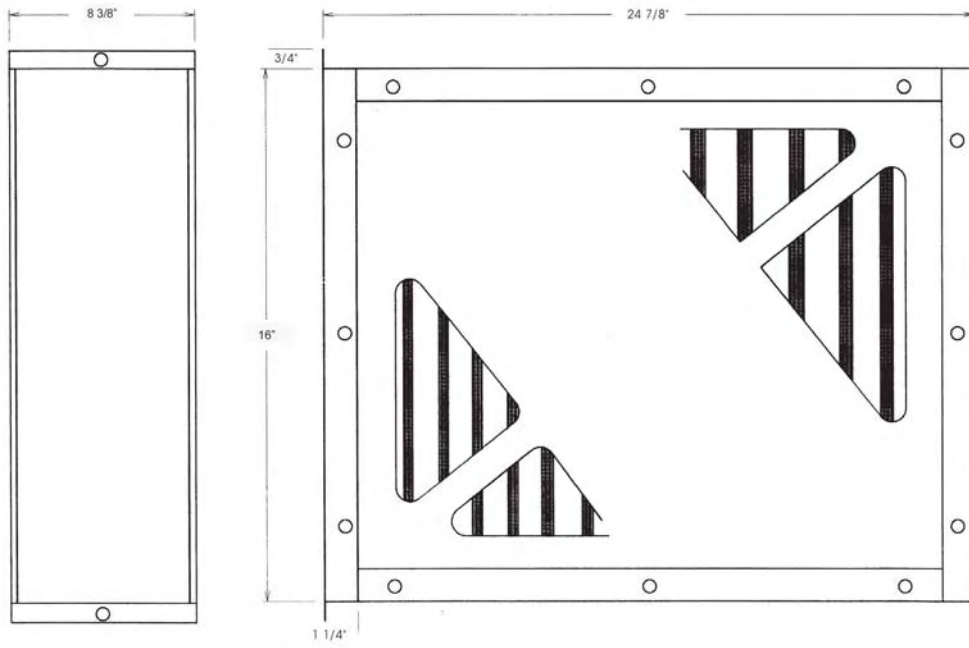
CAP100 FRAME DIMENSIONS (IN INCHES)
